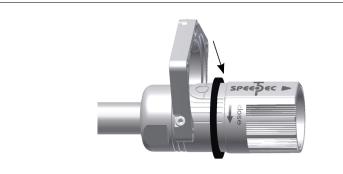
Attaching the metal flange to the connector (rear panel installation)
